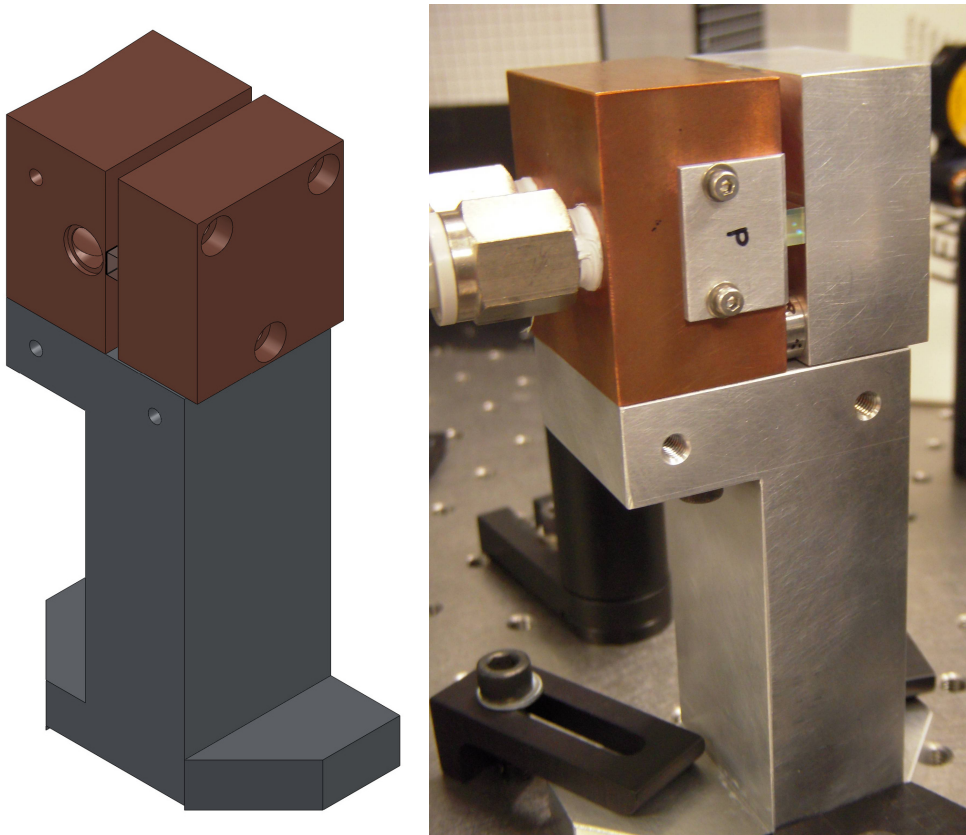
Laser head assembly for the Tm:YAlO₃ ThOR slab.
